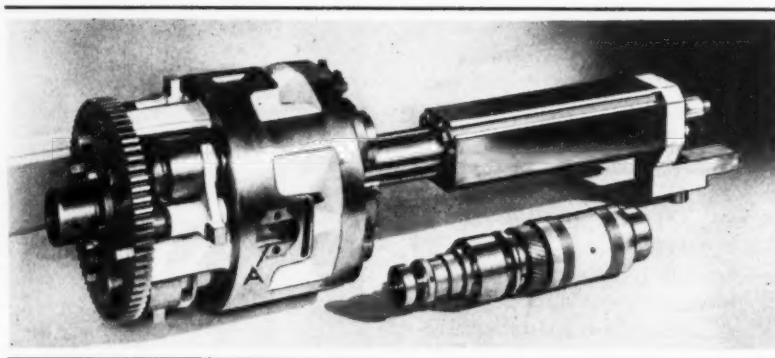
The Spindle-carrier Assembly, which is Completely Lifted from its Bearing Surface during All Indexing Movements
